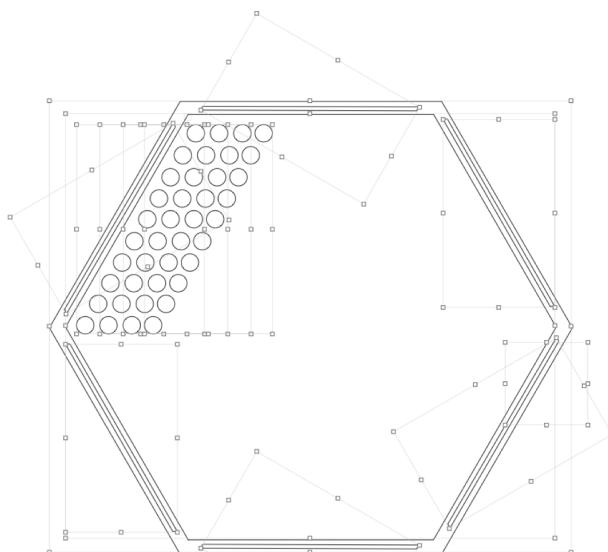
Engineering drawing of an AILEM-HD fuel assembly
